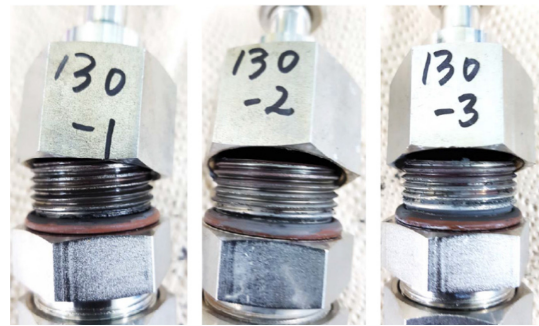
Disassembled fitting parts and O-ring after 6 month at 130°C.
